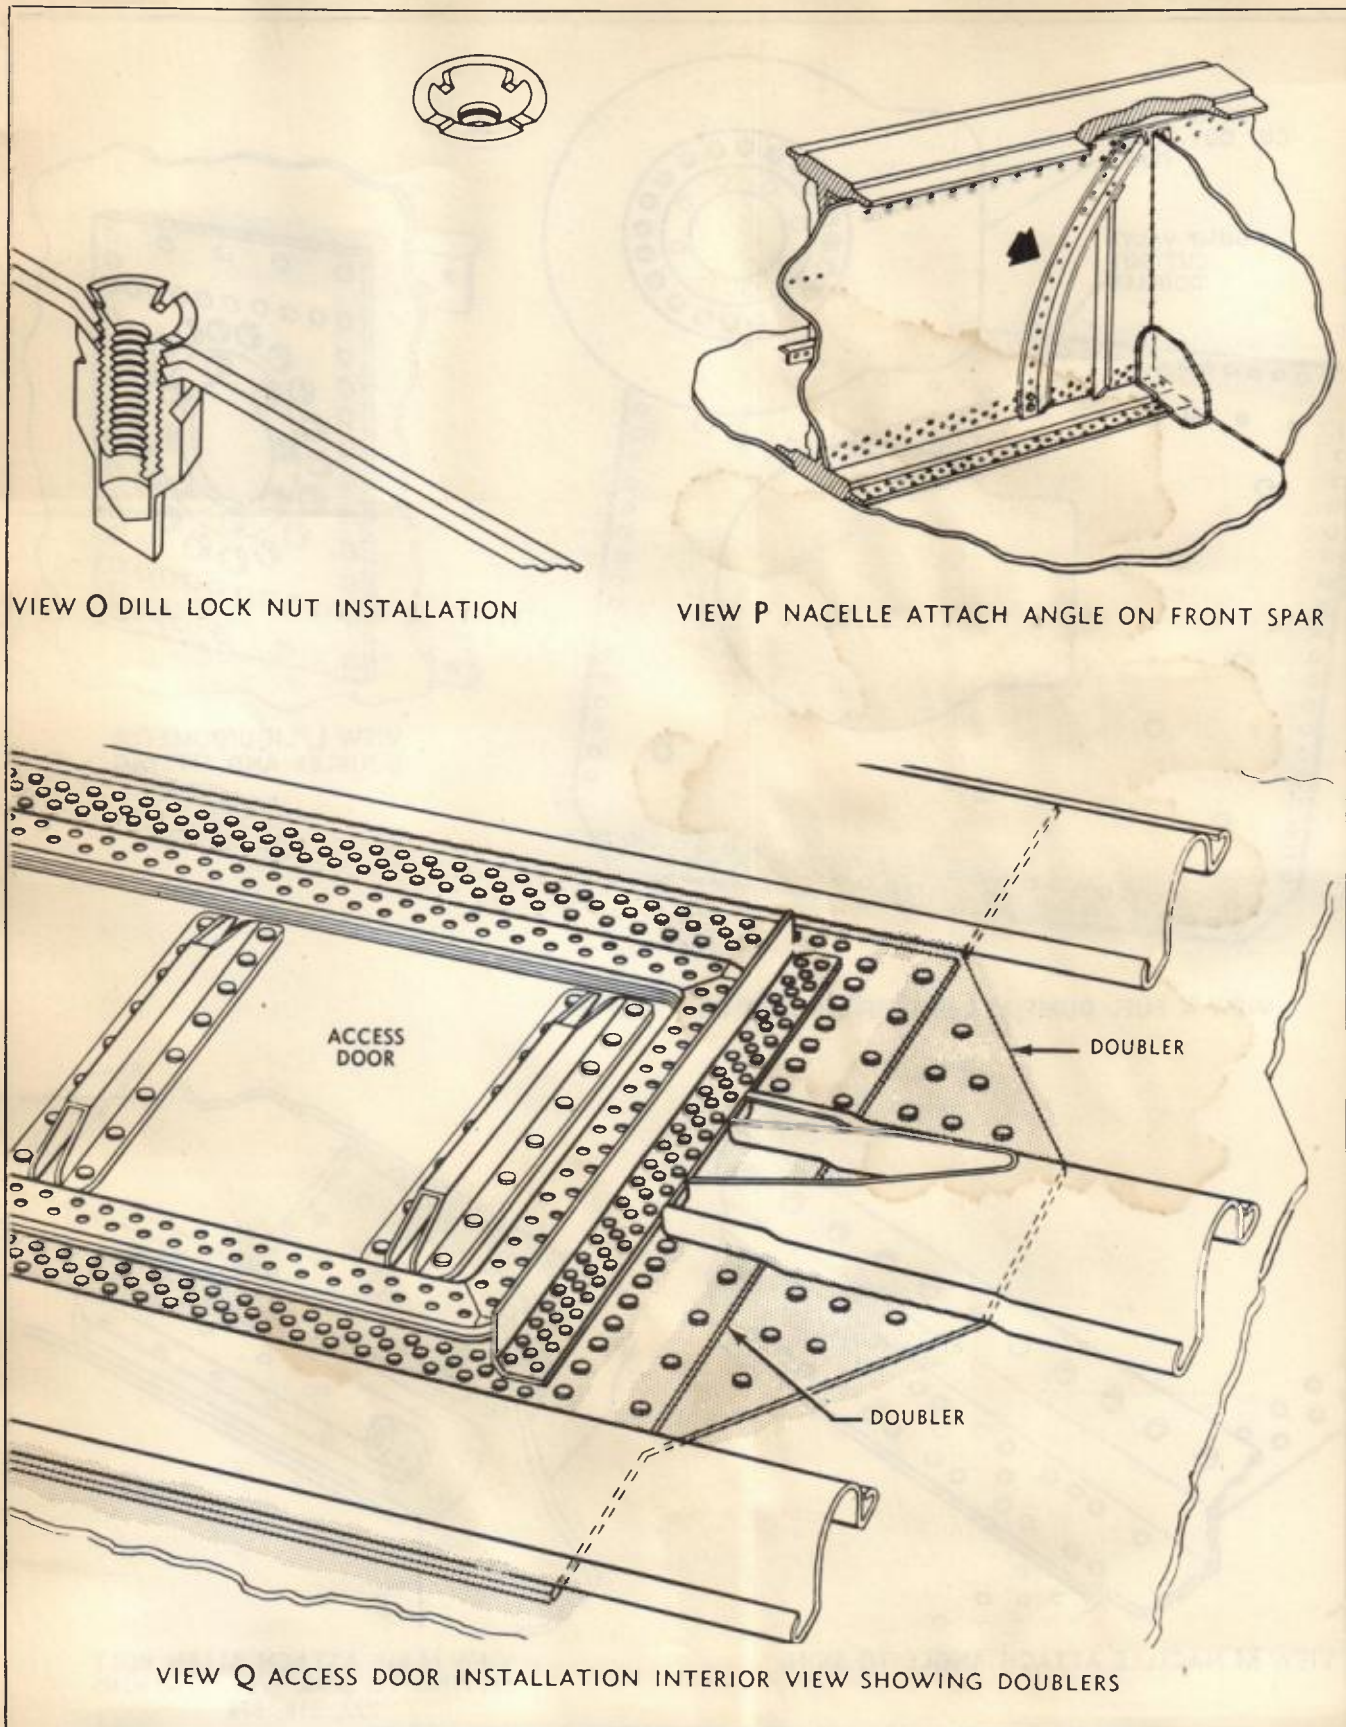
(Sheet 5 of 6 Sheets) — Fuel Tanks — Possible Leakage Areas
